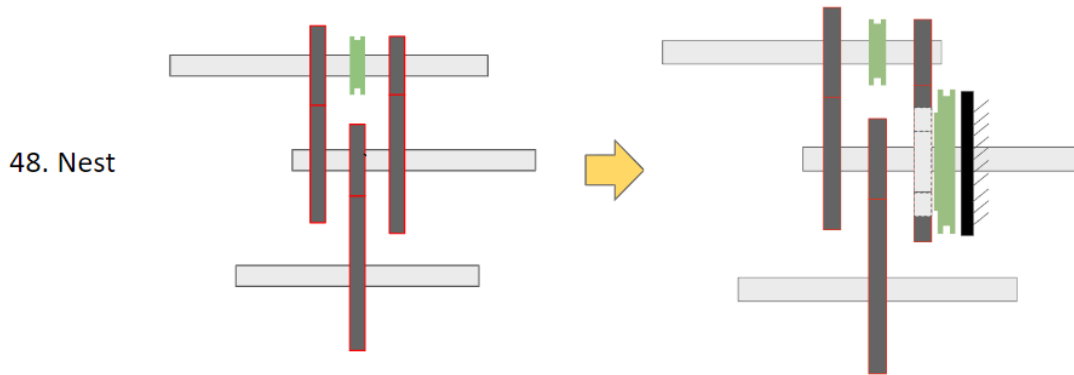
Another idea was generated by nesting a planetary gearbox within the 2024 gearbox on the intermediate shaft that would allow shifting between the reverse gear and high torque gear.
